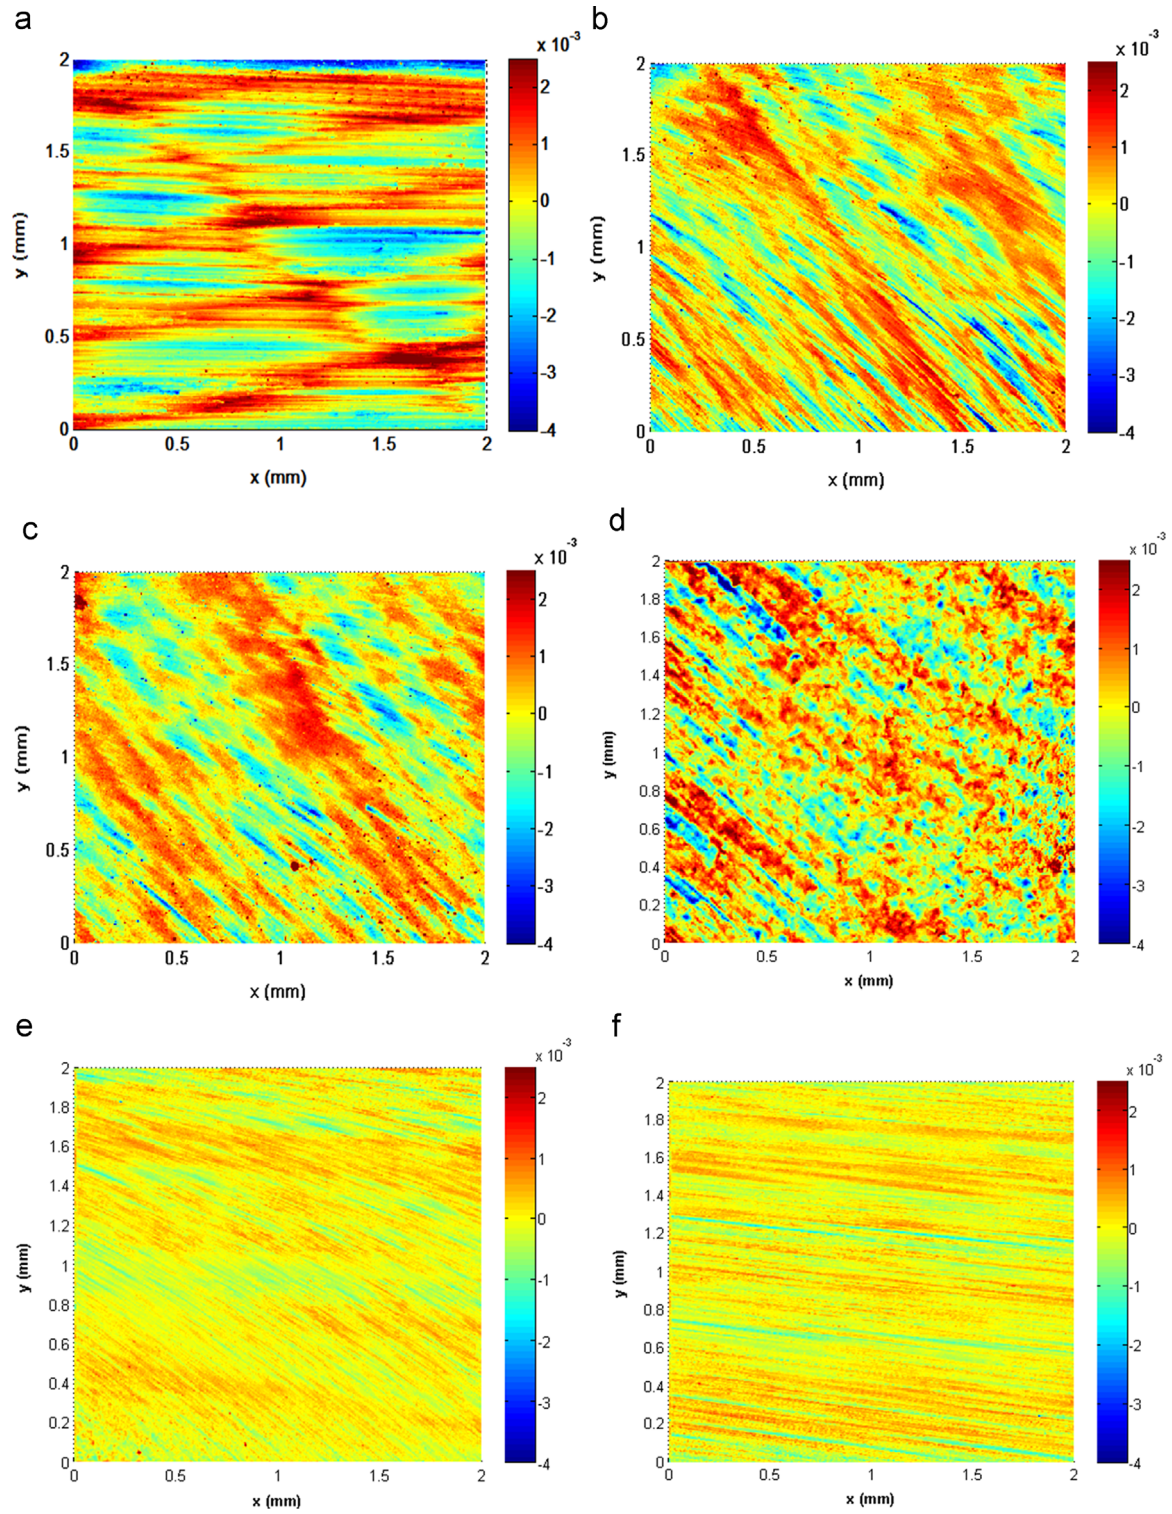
3D micro-topographies (2 mm × 2 mm) of tooth surfaces generated respectively (a) after hobbing, (b) after shaving, (c) after carbonitriding, (d) after shot peening (without hard finishing), (e) by power honing and (f) by grinding. The color scale is in millimeters. (For interpretation of the references to color in this figure legend, the reader is referred to the web version of this article.)
